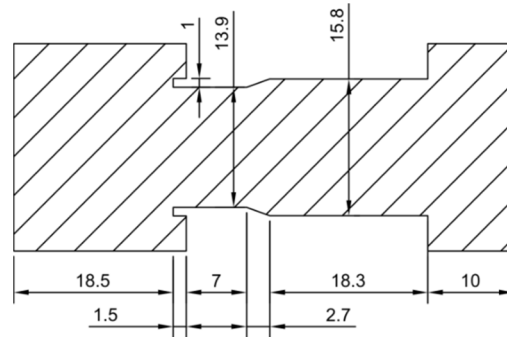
Cross-sectional view of the bolt and nut assembly model.
